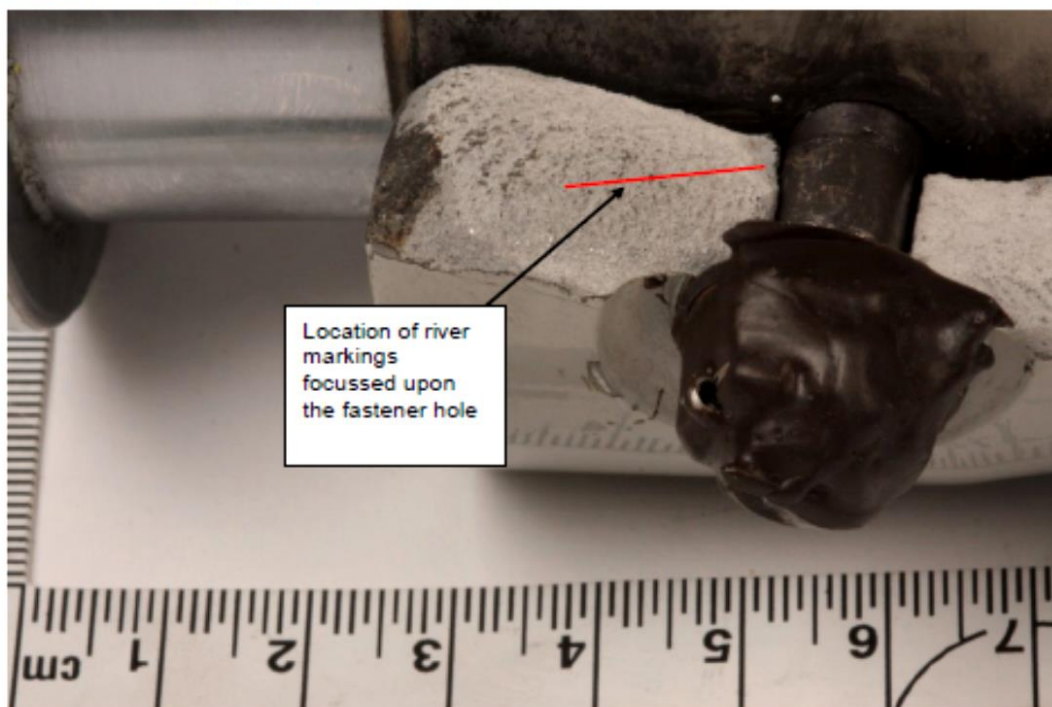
Showing the details of fracture surface 'A1'.
